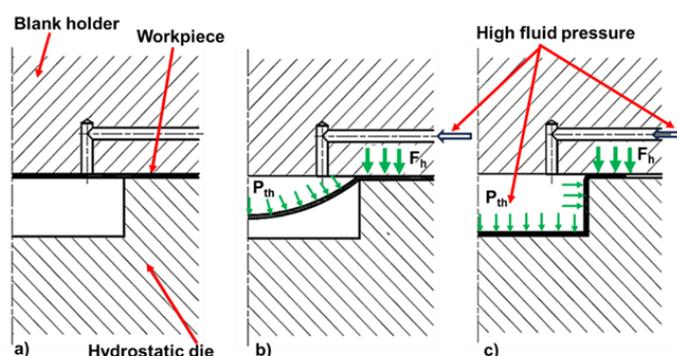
The process of hydrostatic forming of sheet workpiece.
